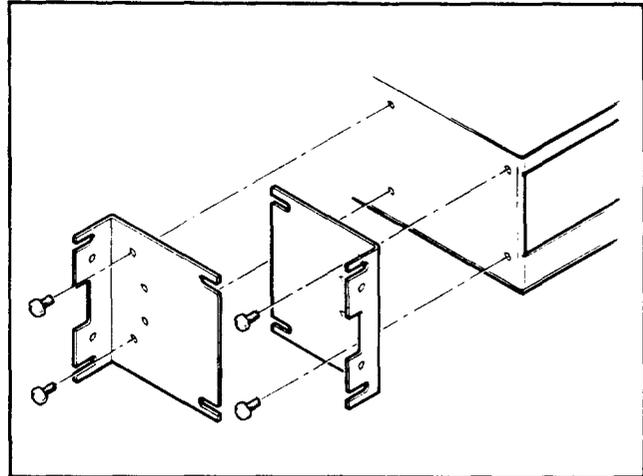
Bracket Attachment 19 in. Rack Mounting
